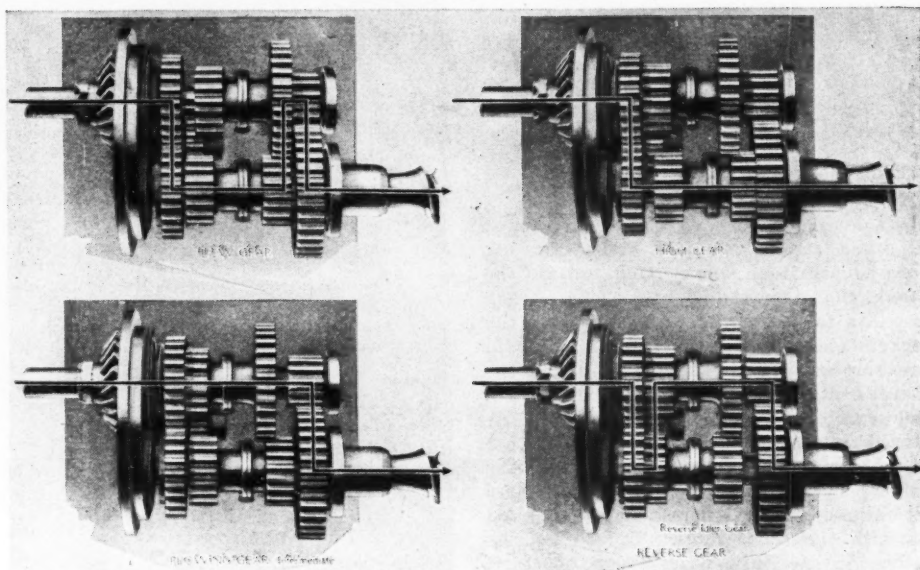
View showing four positions and different sets of gears engaged when the Fordson tractor is in low gear, high gear, plowing gear and reverse
